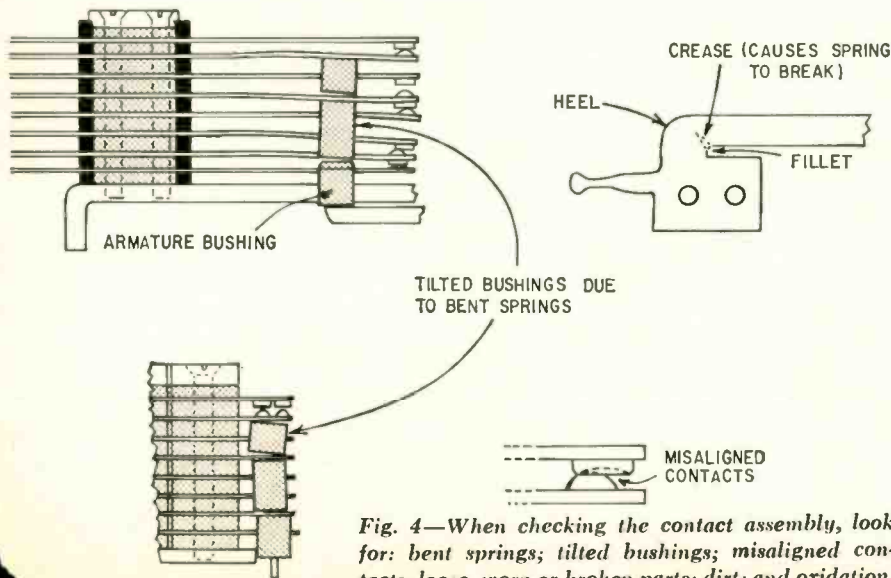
When checking the contact assembly, look for: bent springs; tilted bushings; misaligned contacts; loose, worn or broken parts; dirt; and oxidation.
